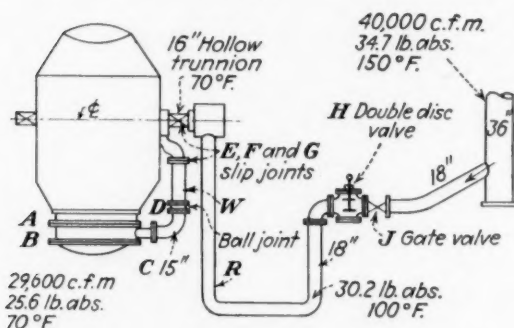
TYPICAL ARRANGEMENT OF 25-TON PLANT.
